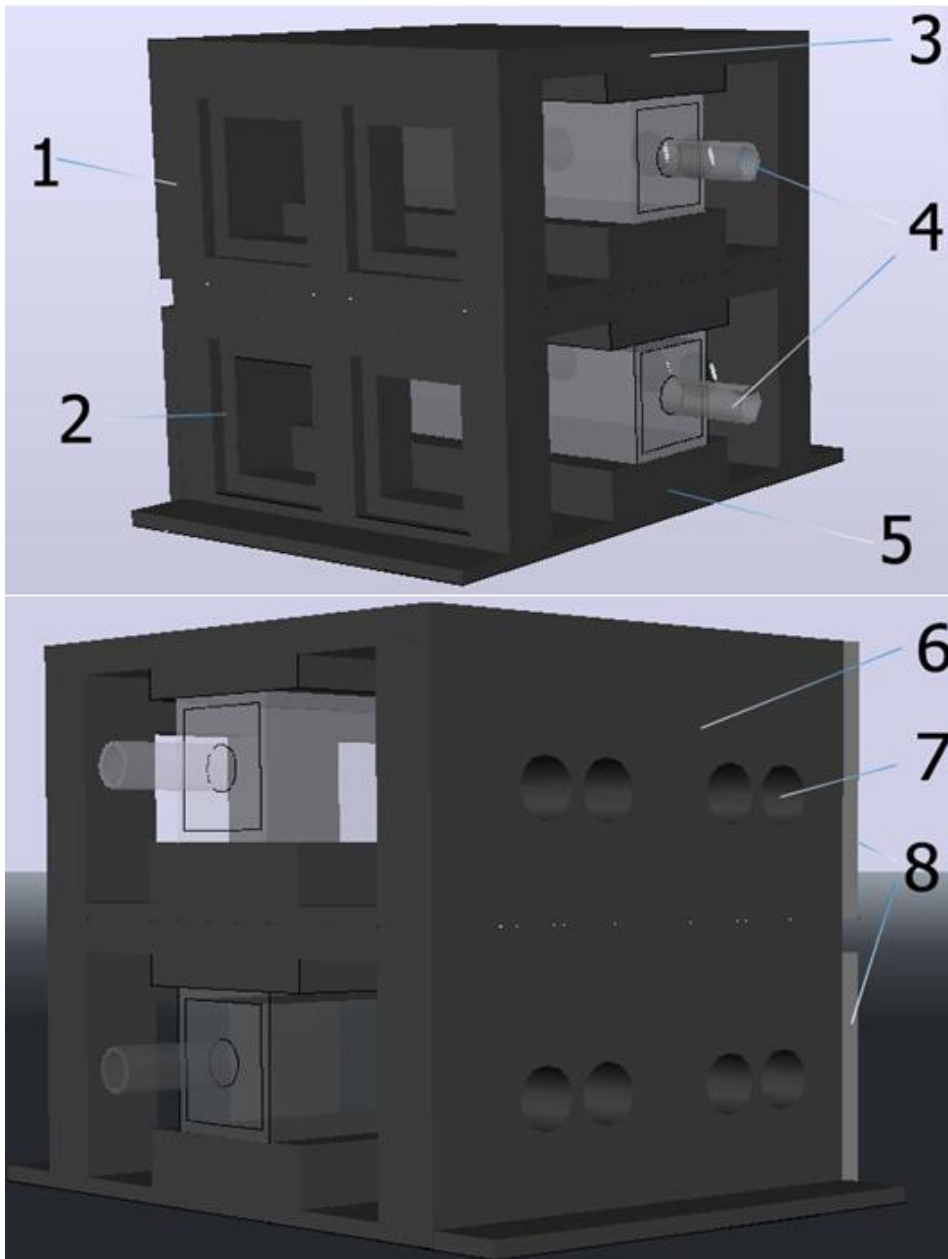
3D design of the sensor housing in AutoCAD (Picture on the top is the left side view of the sensor housing: the top level is the reference housing and the bottom level is the sample level. Part 1 is the top level detector plate. Part 2 is the detector widow where detector mounted in. Part 3 is the top plate together with the Part 5 bottom plate to hold the flow cell which is part 4. The part numbers referred to different levels. Picture on the bottom is the right side view of the sensor housing. Part 6 is the LED plate which has Part 7 is LED holder to hold the LEDs in place. Part 8 are the back side plates which secure the flow cell in length. In the figure, the front side plates are not shown to give the better view of the flow cells.)
